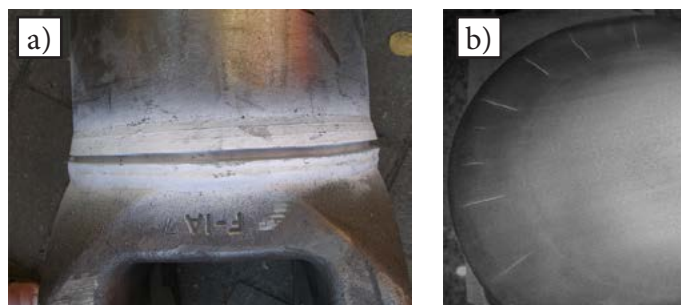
Cracks in a welded joint: a – view of the joint after a penetrant test (groove indented by the manufacturer facilitated the detection of cracks), b – radial cracks on the joint cut surface along the groove
